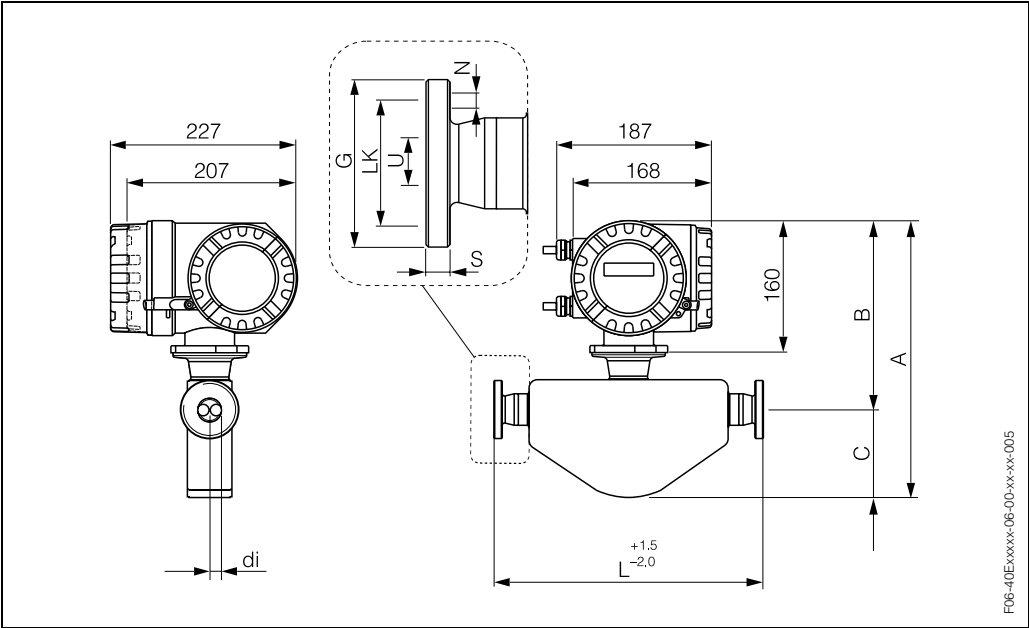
Dimensions Promass E: flange connections DIN 11864-2 Form A
